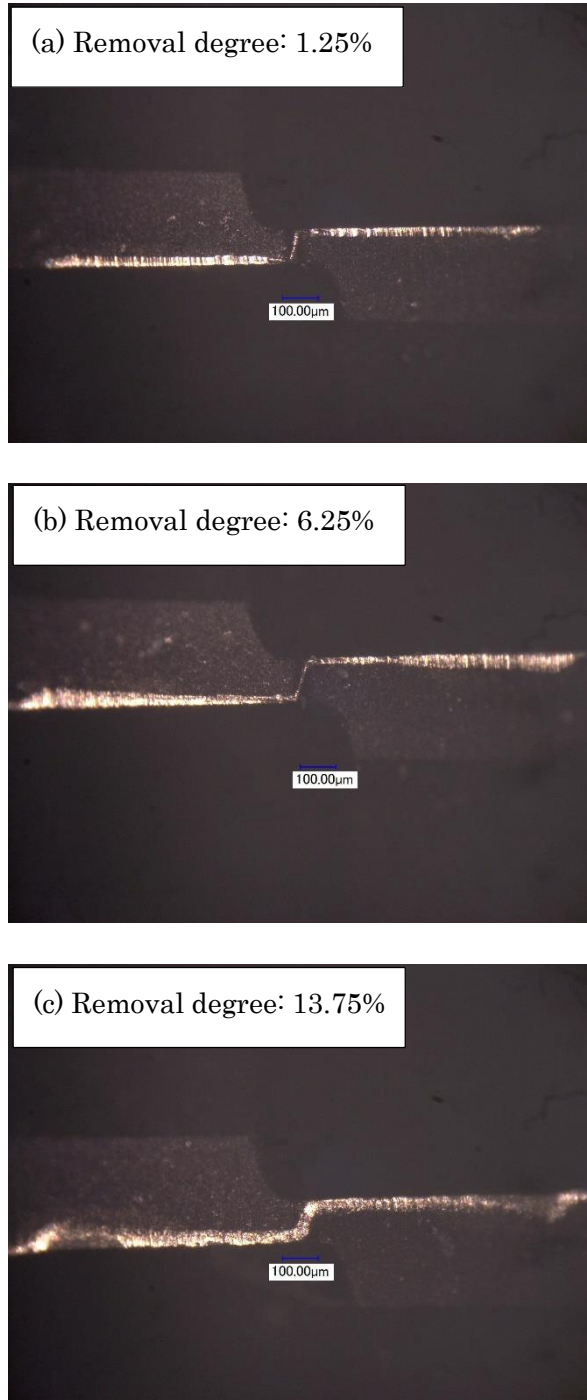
Images of flank wear of ball end mill at different removal degree.
